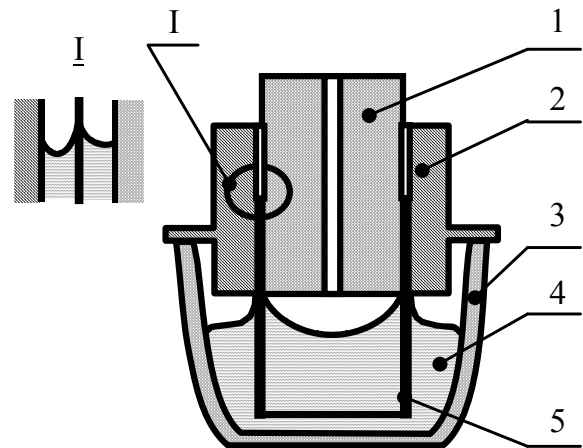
The schema of the assembly unit: 1 - glass or ceramics; 2 - metal holder block; 3 - ceramic auxiliary crucible; 4 - solder; 5 - metal conductors by which solder is transported.
